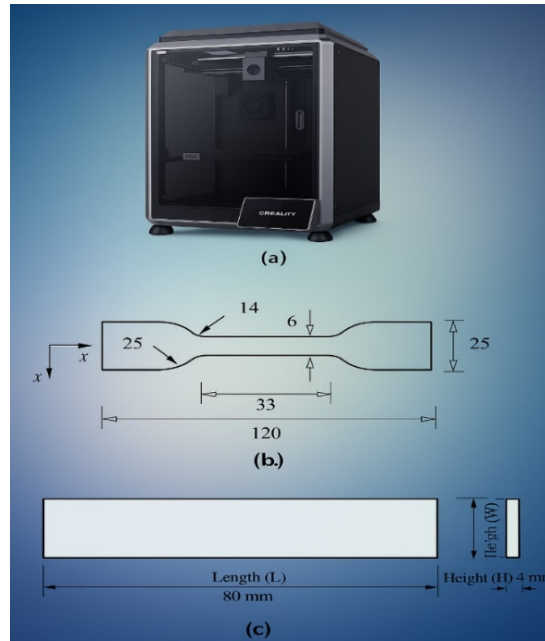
a.) three-dimensional printer used in the study, b.) ISO 527-3 tensile test specimen dimensions, c.) ISO 179-1 charpy test specimen dimensions.
